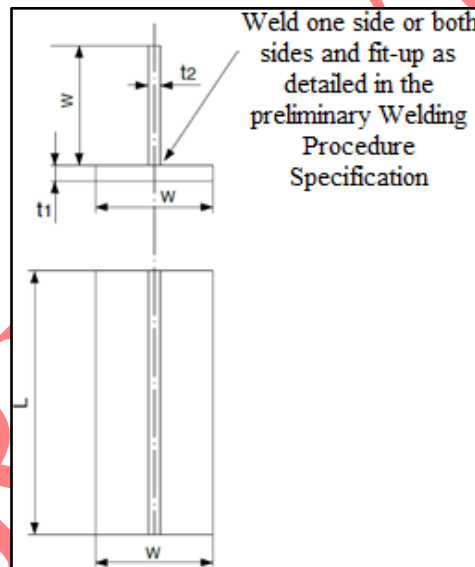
Dimensions and types of test assembly for fillet welds
